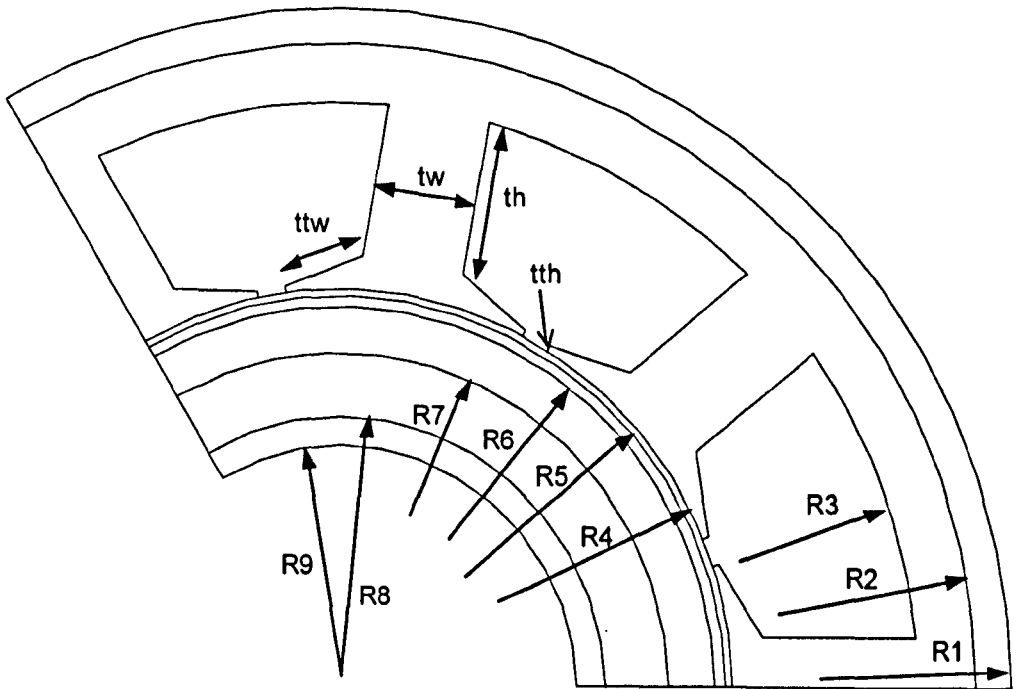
Key dimensional parameters of the BLDC machine for the EHA application (actual dimensions are given in Table 2.1).
